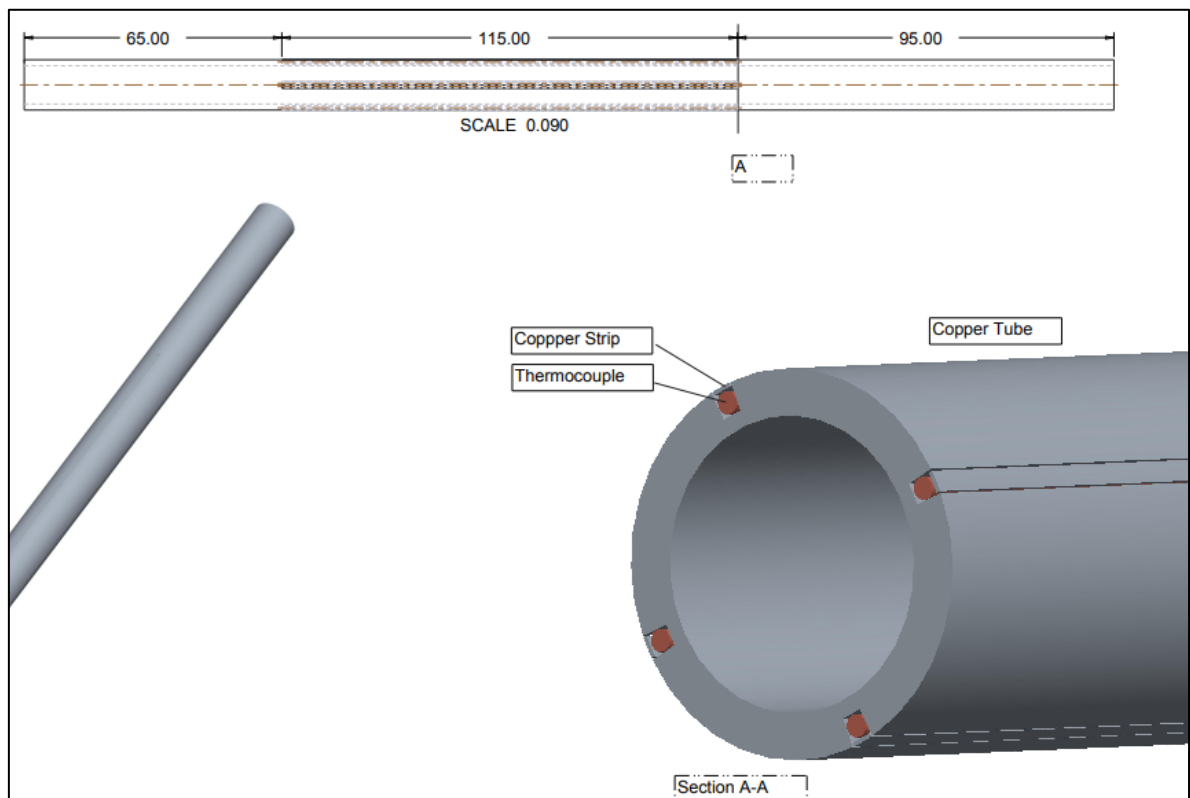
Instrumented tubes, (a) four thermocouple grooves cut into longitudinal direction. (b) thermocouples embedded in the grooves and covered with the copper strip.
